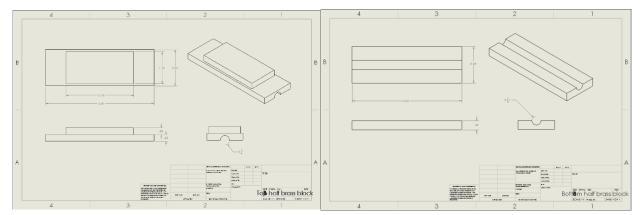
Engineering Drawings for the Heater Block. A hole is drilled for a thermocouple to be placed in the heater block.
